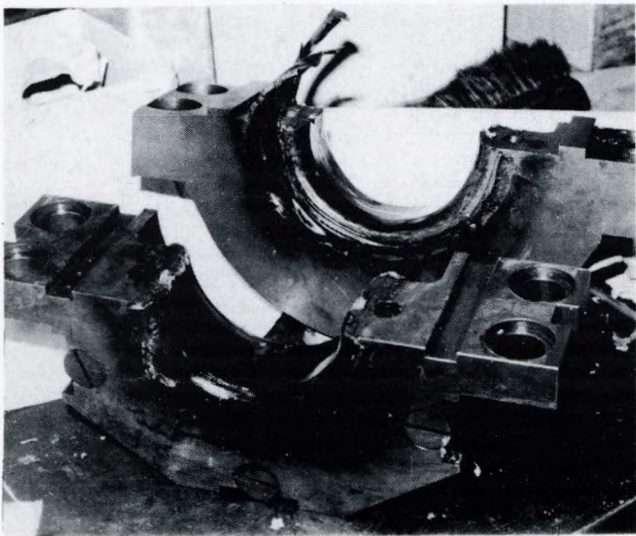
Jackshaft bearing housing of 'HMS Zulu'
